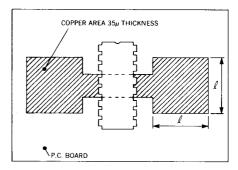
Example of P.C. Board Copper Area which is used as Heatsink
